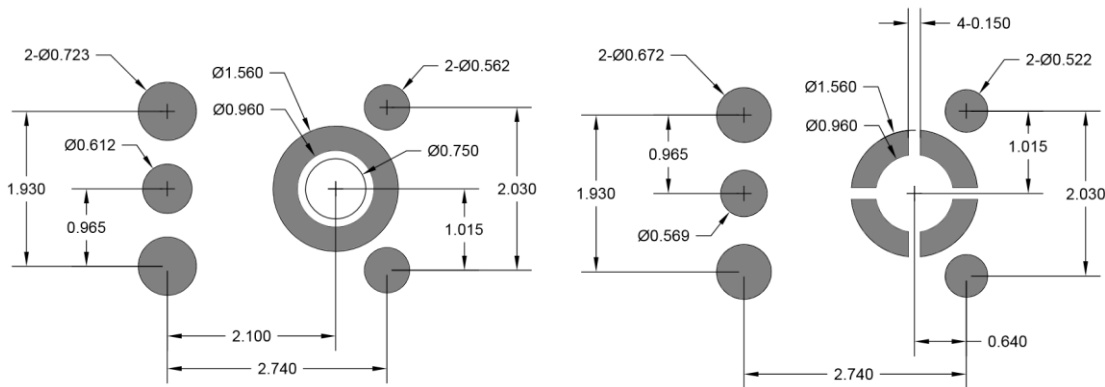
VM1000 PCB land pattern (left) and solder stencil pattern (right)
